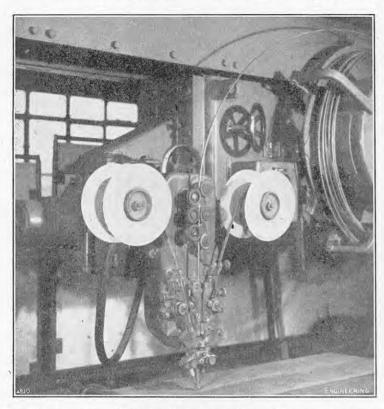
Automatic Welding Equipment; Murex Welding Processes, Limited.
